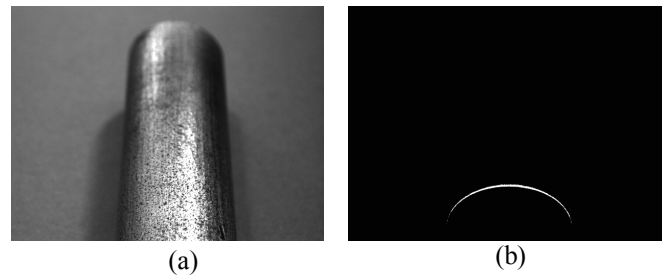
(a) Cylinder in test jig and (b) laser trace on cylinder
